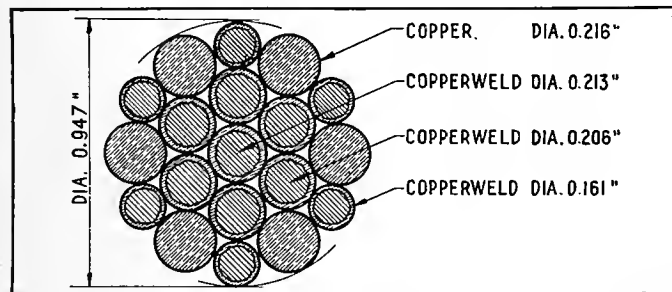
Section of cable used for crossing spans showing arrangement of copper and Copperweld strands.
